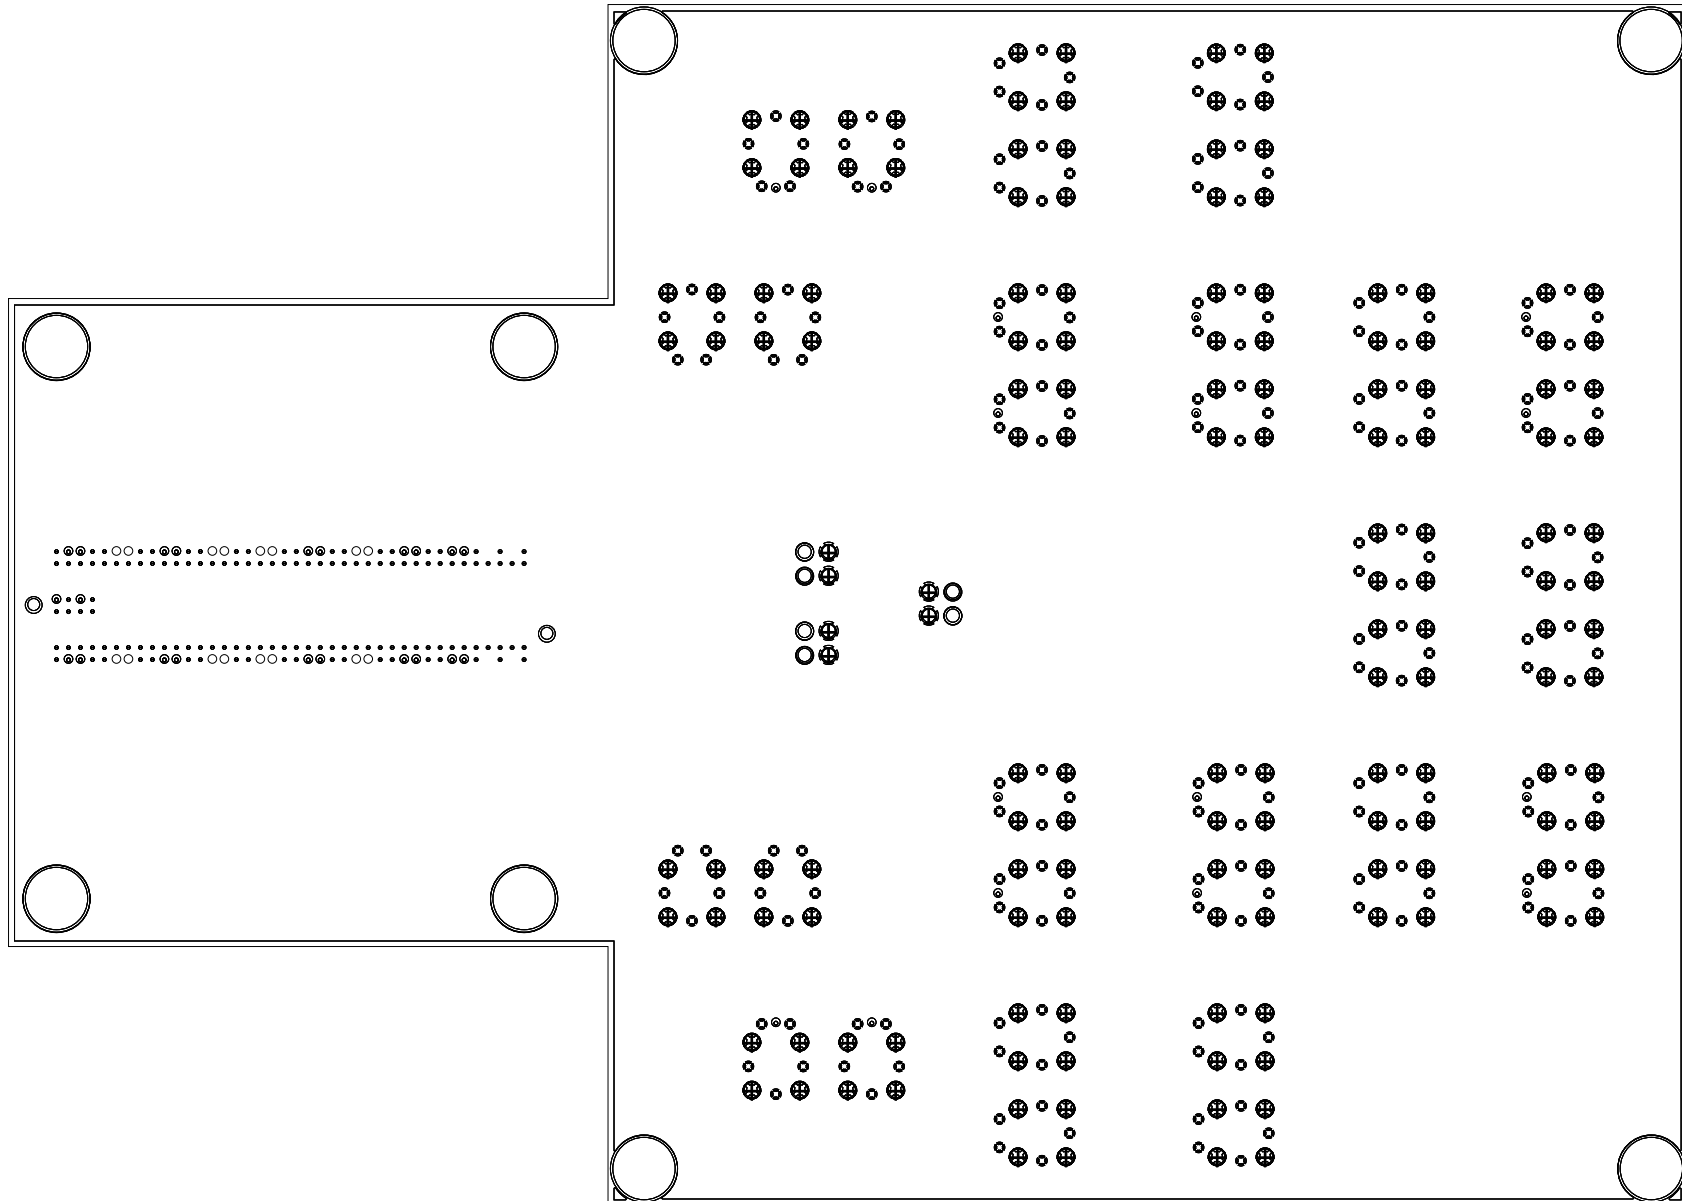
TLK10232 EVM SMA Breakout Board Layout, Internal GND (Layers 3, 4, 5)
